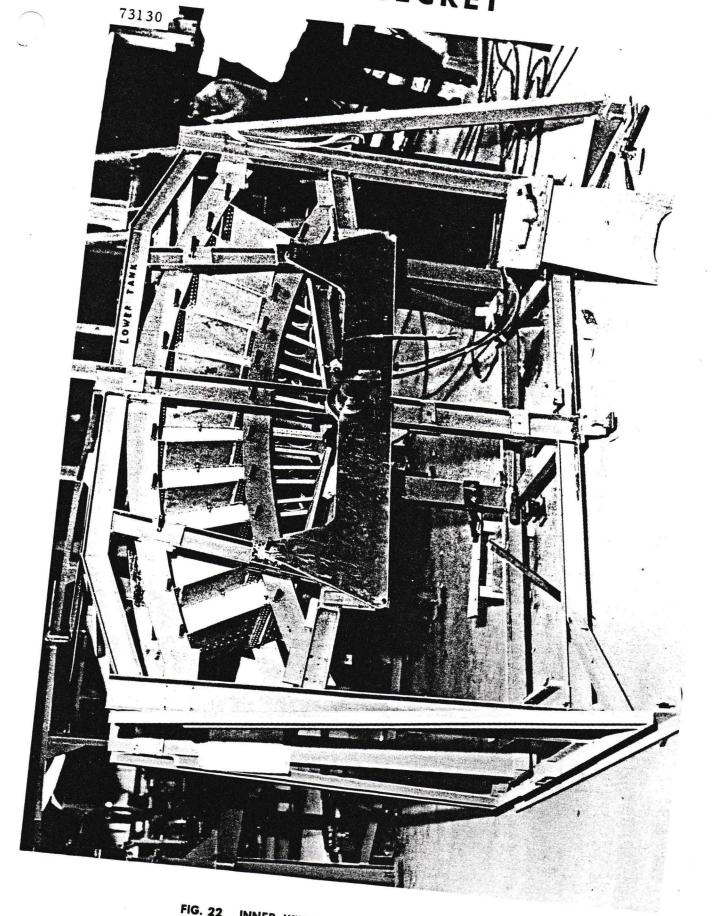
INNER WING FAIRING IN ASSEMBLY JIG
